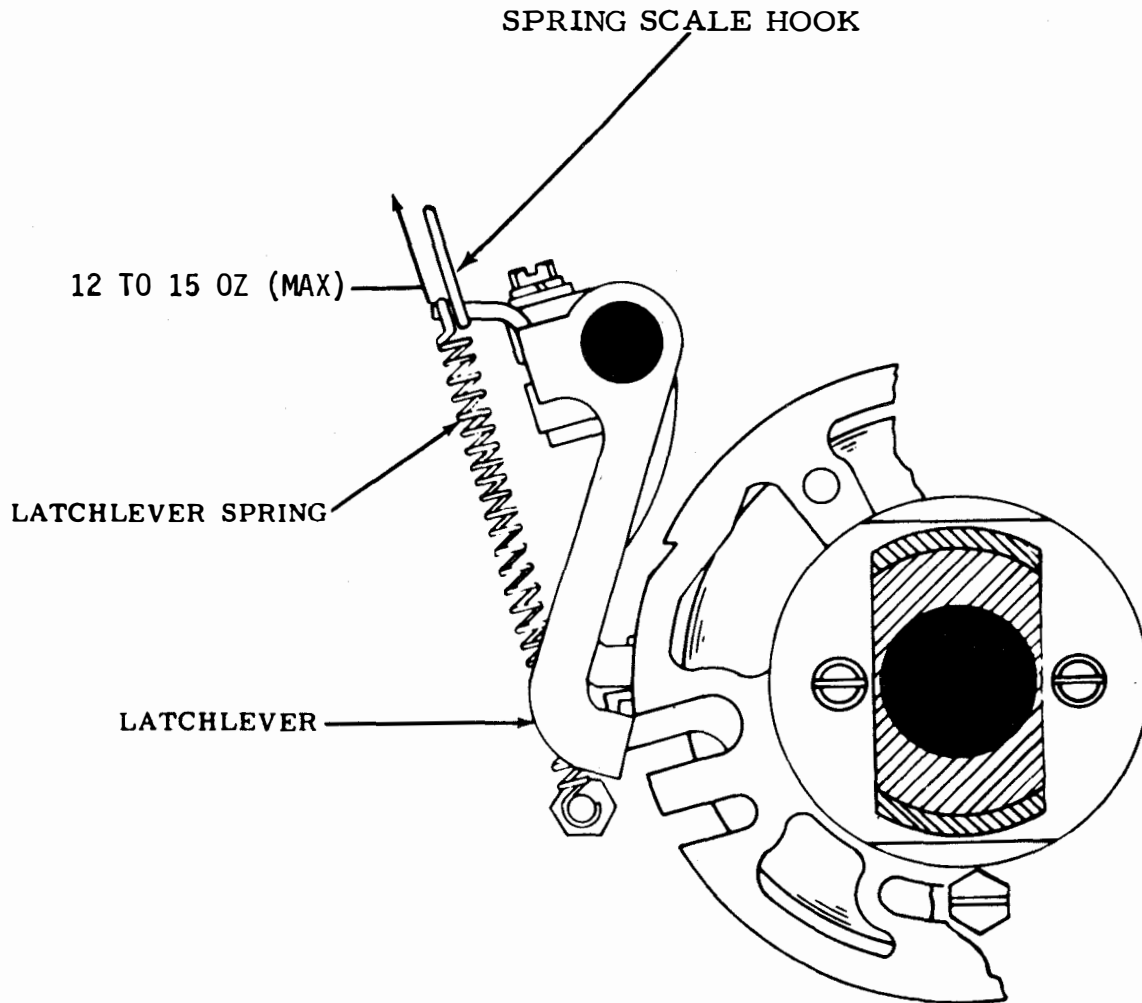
Function Clutch Latchlever Spring, Rear View
